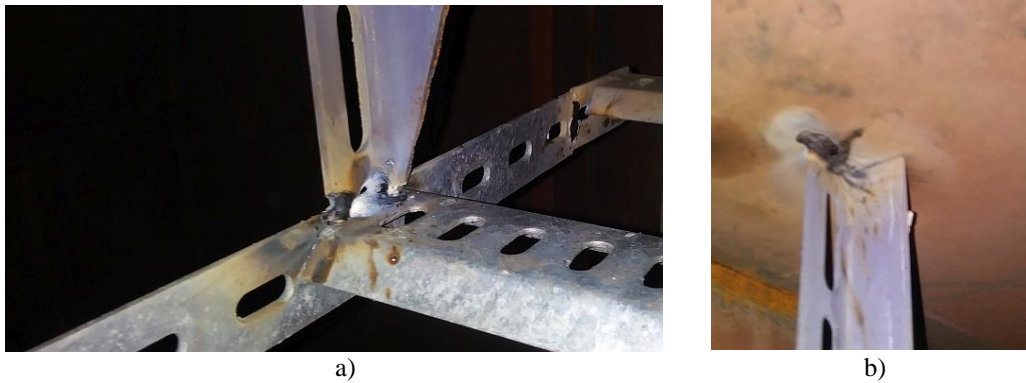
joint after tack welding. a) on cable tray side; b) on hull side
